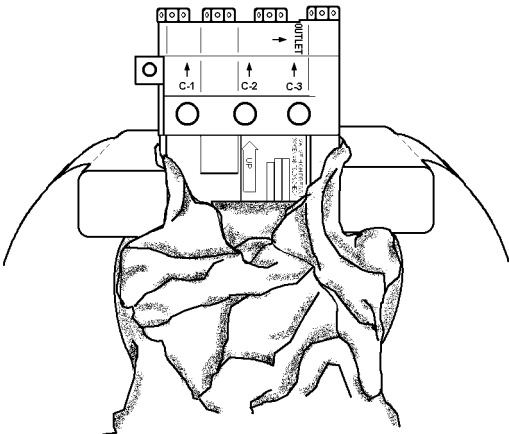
Installing Manifold and Check Valve Assembly in Vise
